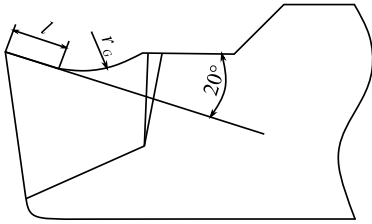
Schematic drawing of the insert with the groove shaped chip former characterized by the chip-breaker land width l and the groove radius r .
